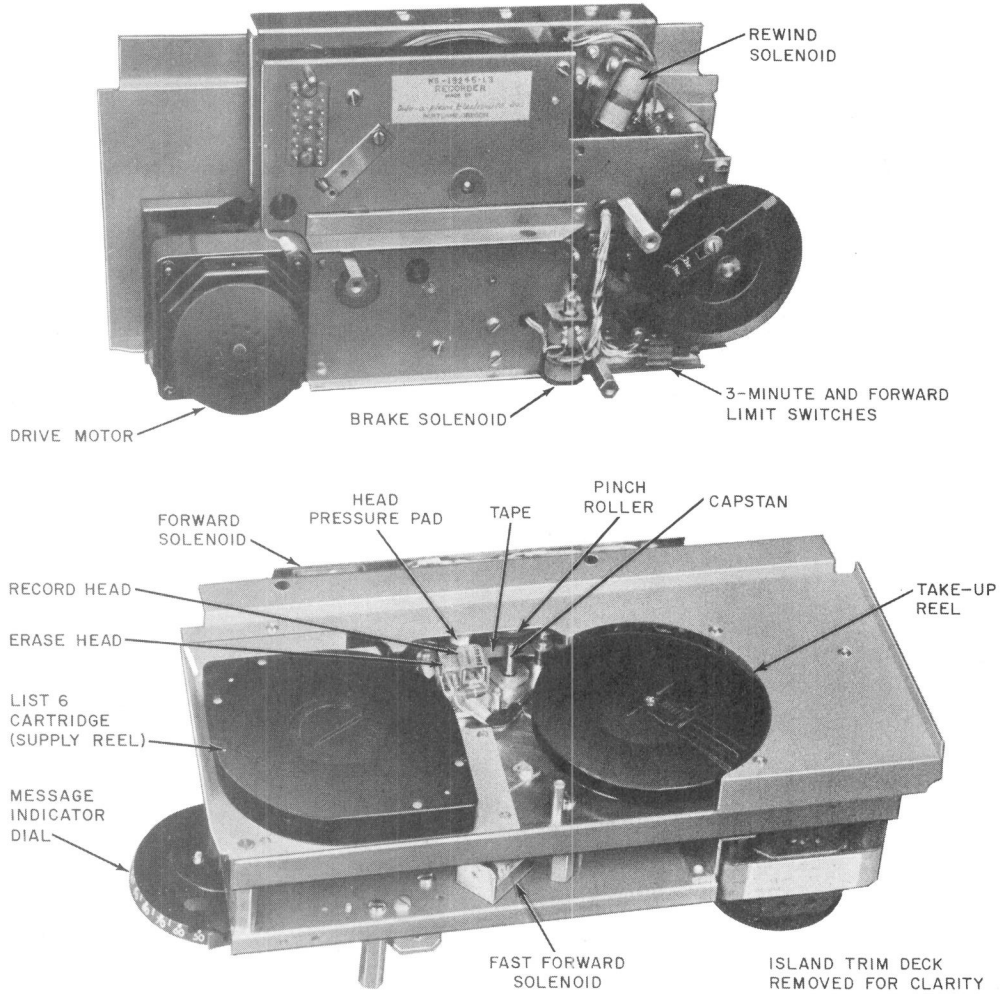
KS-19245, List 3 Recorder Front and Rear Views
